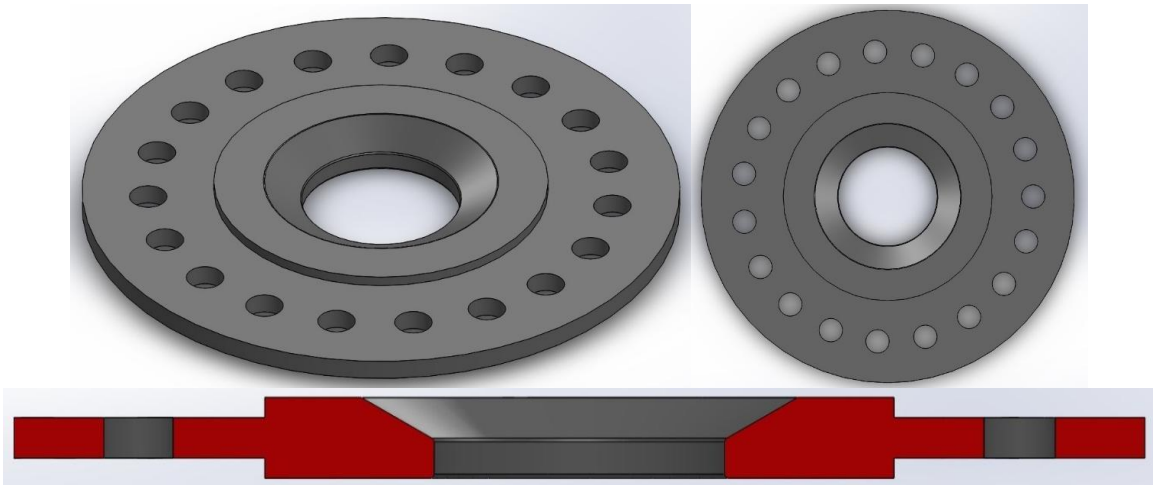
Bottom distributor plate design (top-left: isometric view, top-right: top view, bottom: side cross-section view)
